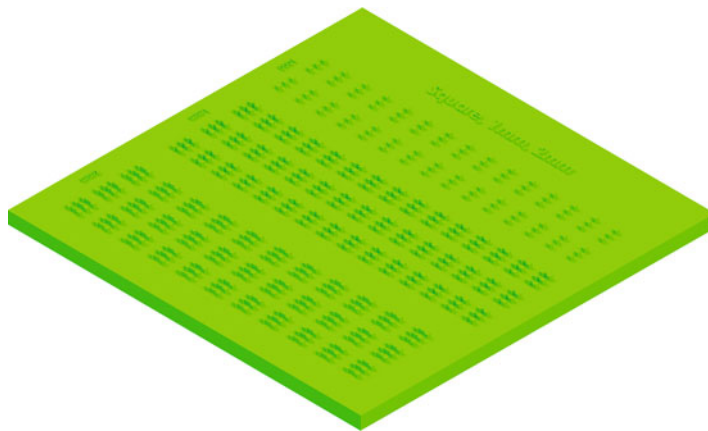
Representative image of CAD designed stencil mold for 3D printing
